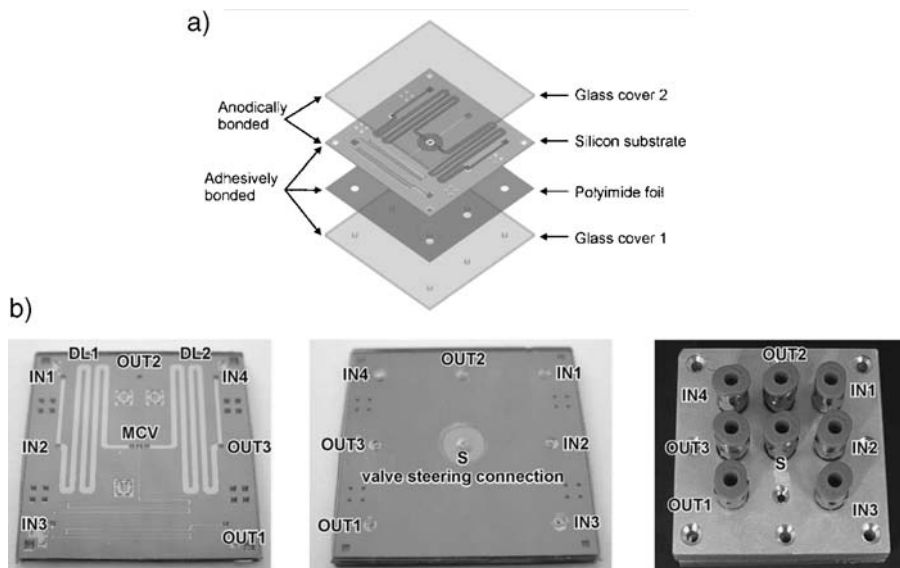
The injector: a) expanded view of the chip, b) front/back-side views of the chip and assembled device in a metal case.
